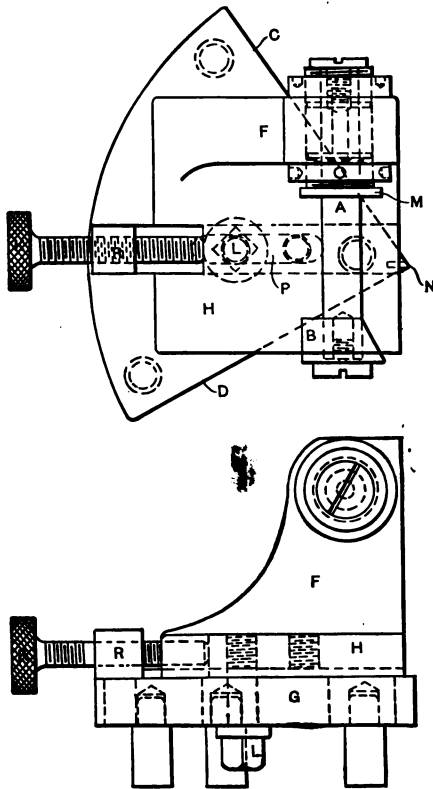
Device for Grinding Tap Fluting Cutter Shown in Fig. 72
